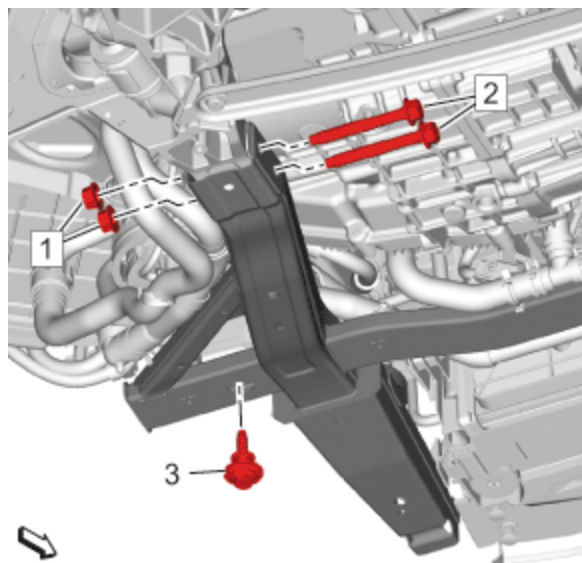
Drivetrain And Front Suspension Crossmember Extension Fasteners
